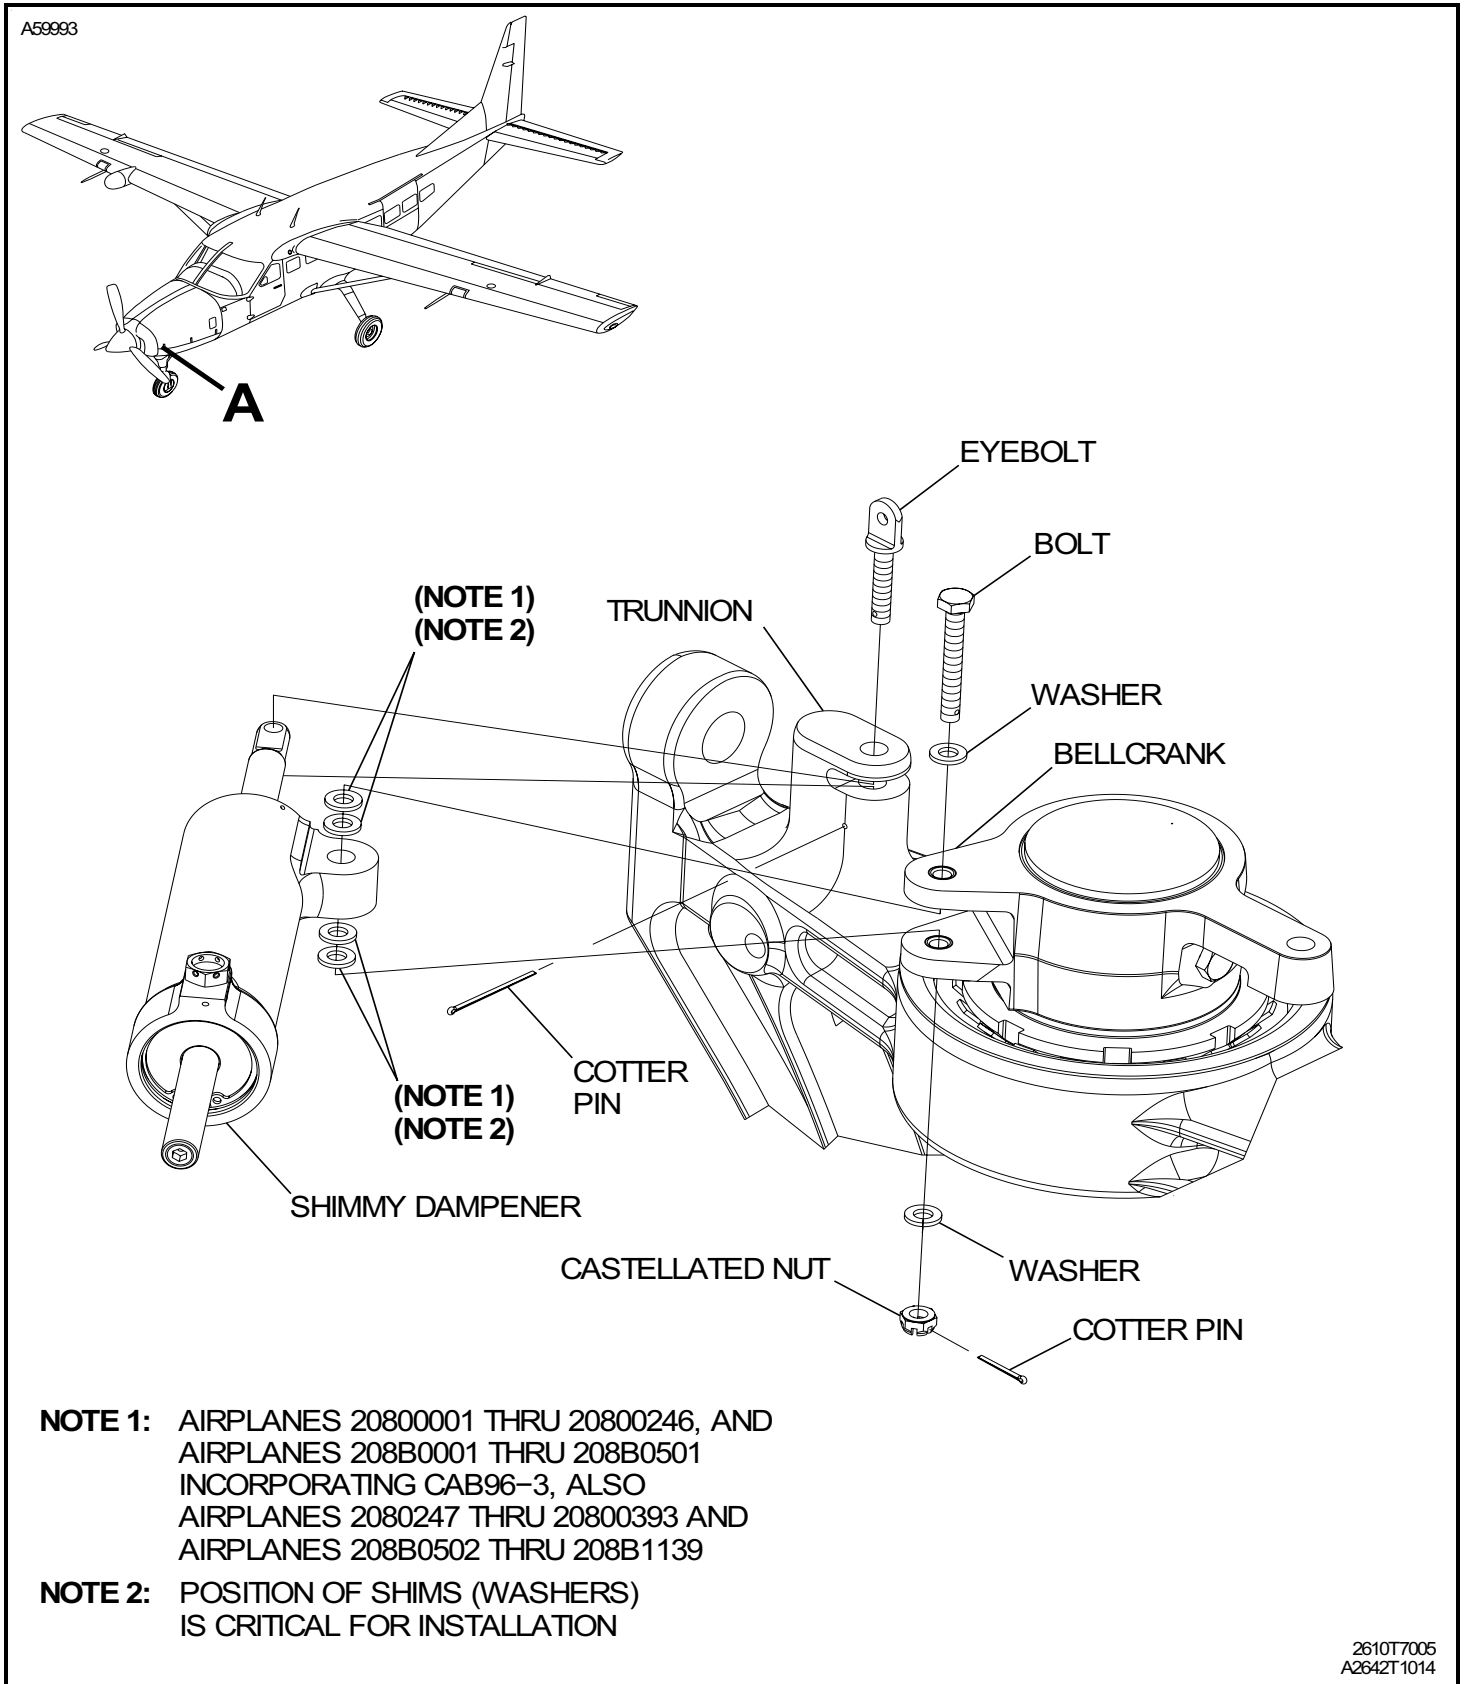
Sheet 1 : Shimmy Dampener Servicing
